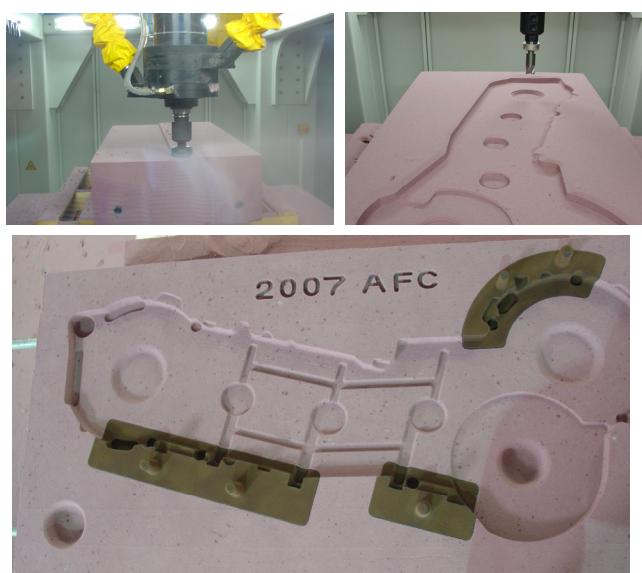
Milling process of sand mold and assembled drag of alpha set mold with direct laser sintered part-molds.
